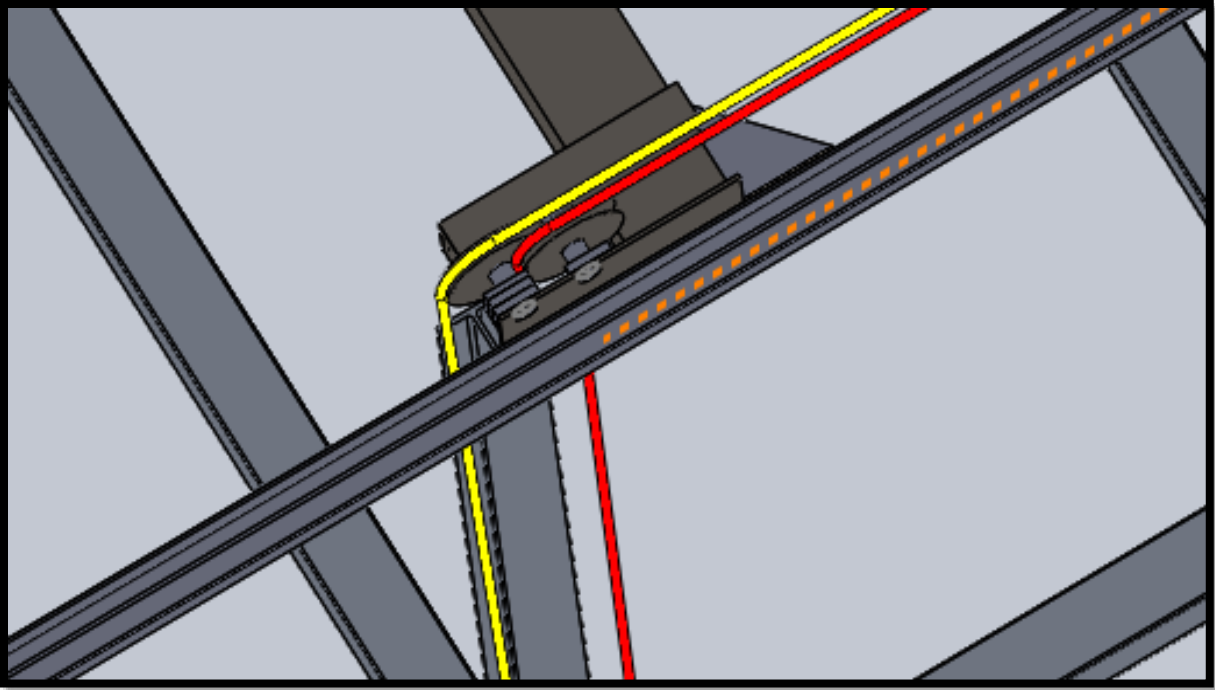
shows the vertical sheave bracket with the two offset sheave.
